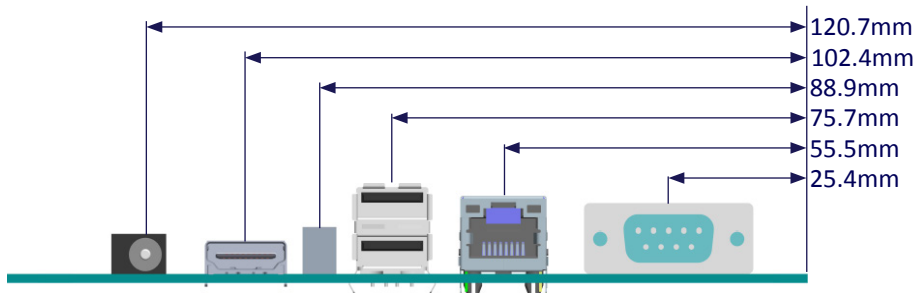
External I/O dimensions of the VIA VAB-3000 board (back panel)
